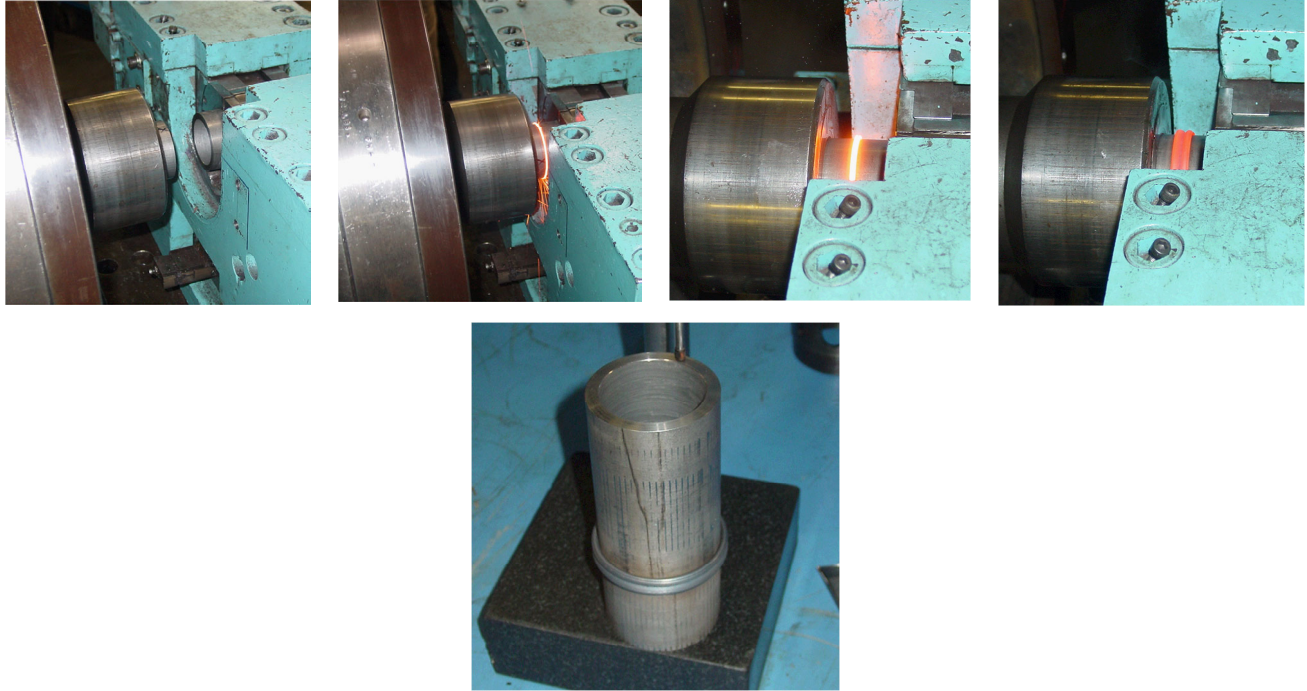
Sequences in the inertia welding of a MA956 tube.
